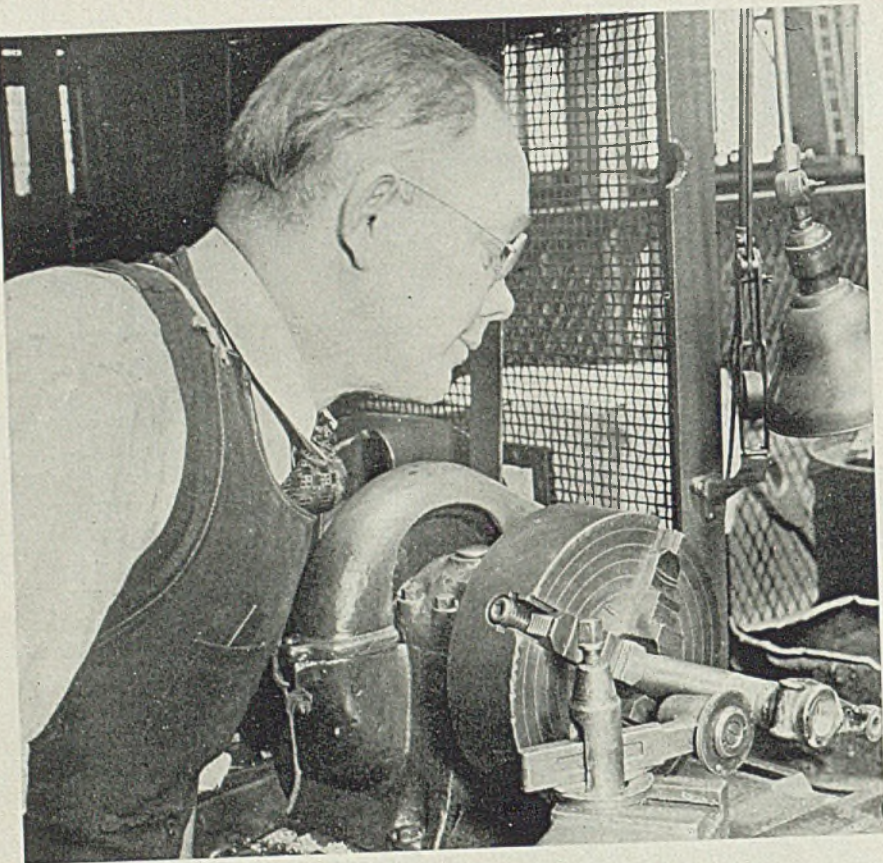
Rotary tool being used for roughing surface of bus clutch throwout shaft and lever assembly prior to metallizing
